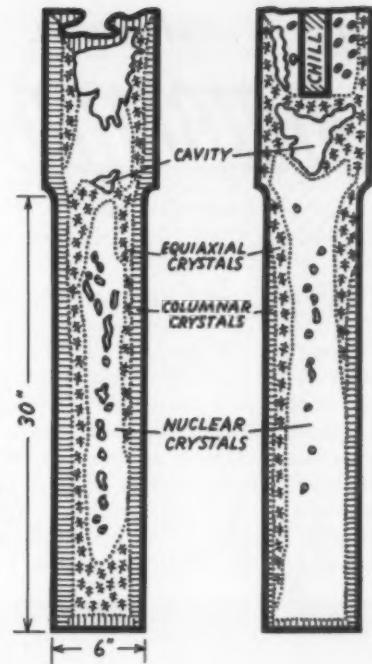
Schematic diagram showing macrostructures of two bar castings poured in the same mold from a common runner. 0.35 per cent carbon steel; dry sand mold. (Gray)¹³
